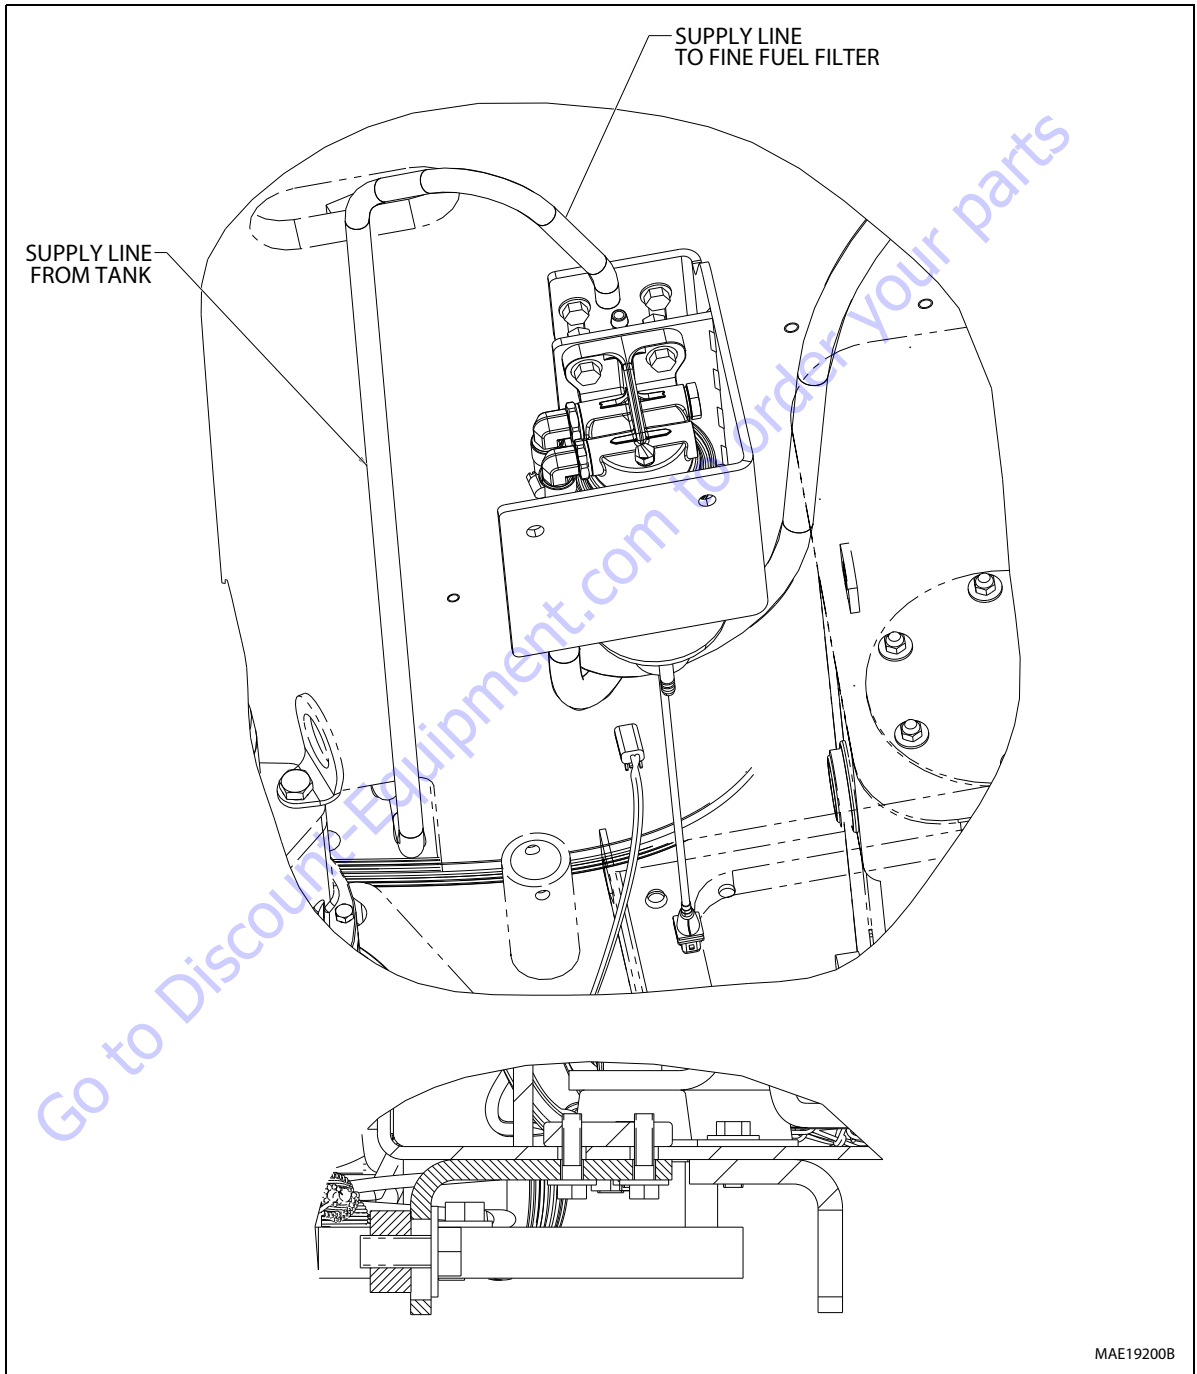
Deutz TD2.9L4 China III Engine Installation - Sheet 3 of 7
